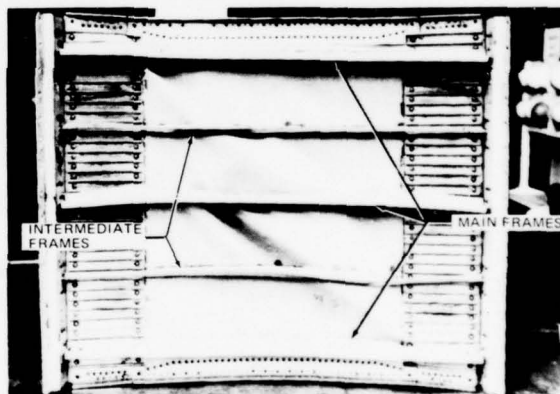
SHEAR AND COMPRESSION FAILURE - BACK VIEW
